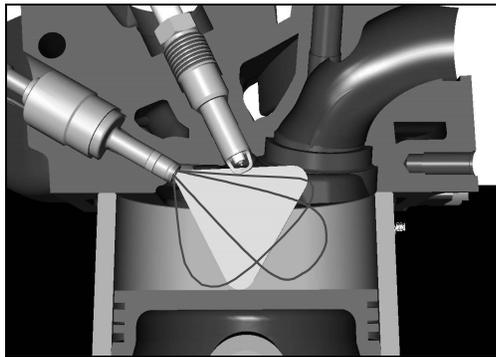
Placement of spark plug and fuel injector (with spray configurations outlined)
